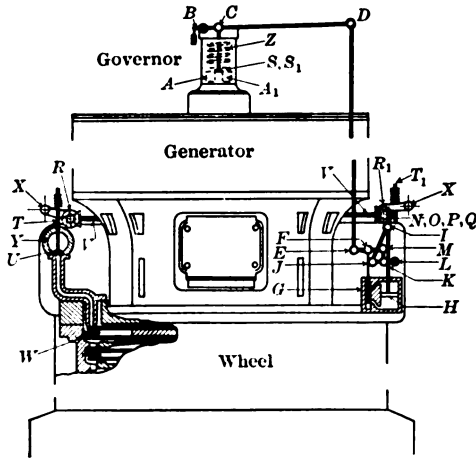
CURTIS HYDRAULIC VALVE GEAR
